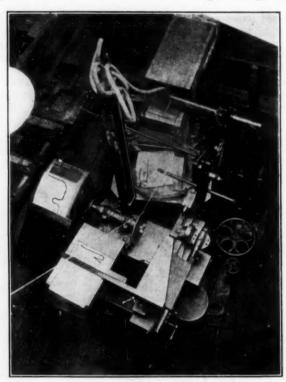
Top View of Combined Traversing, Plotting and Enlarging Machine Improvised from a Scrapped Grinder
